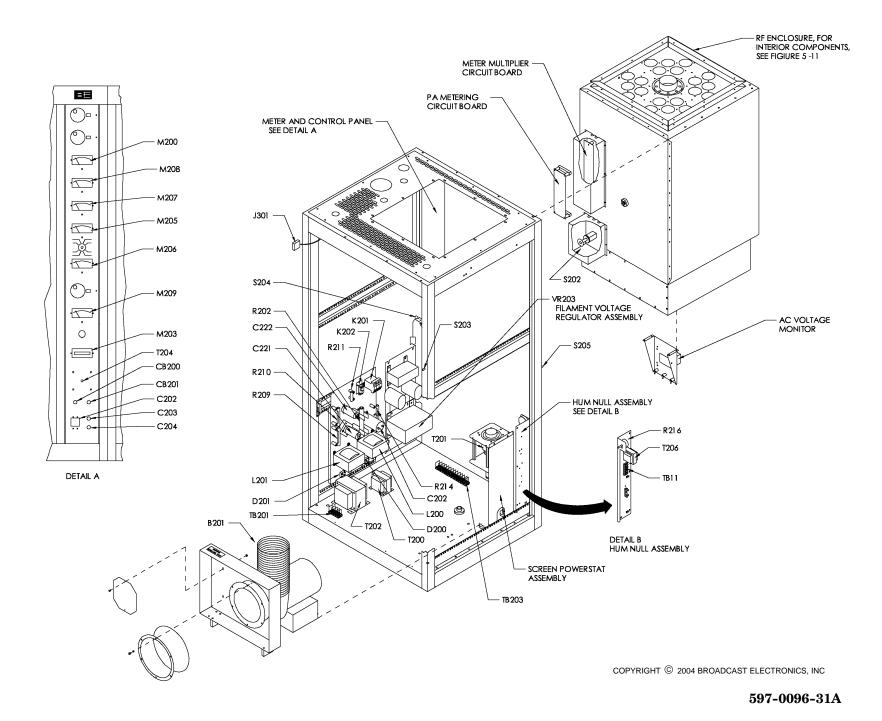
FM-25T POWER SUPPLY CABINET COMPONENT LOCATOR (Sheet 1 of 2)
